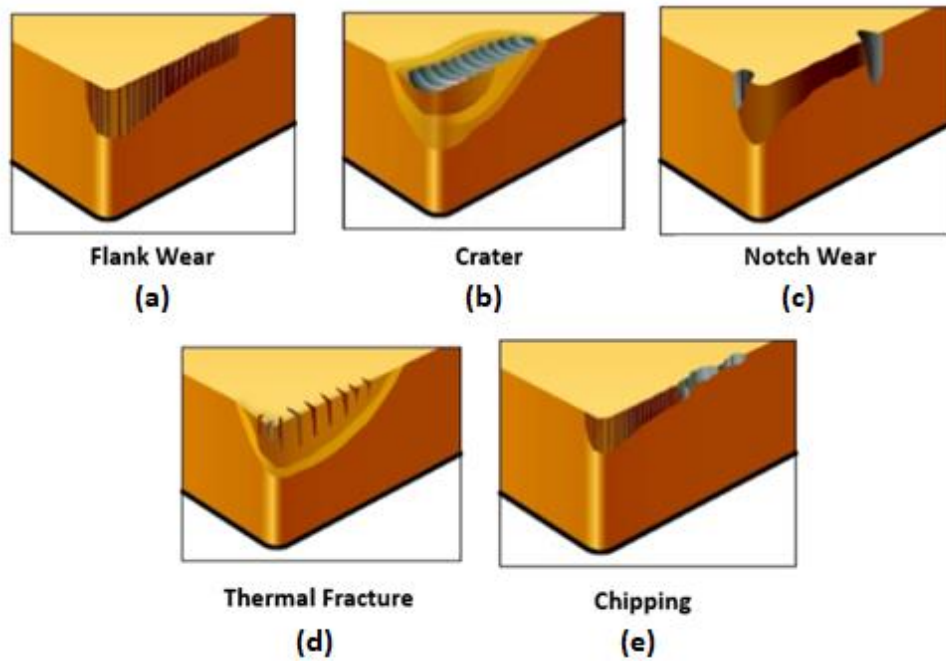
Wear types occurring in cutting tools during machining operations: (a) flank wear; (b) crater; (c) notch wear; (d) thermal fracture; and (e) chipping. Adapted from [86]
